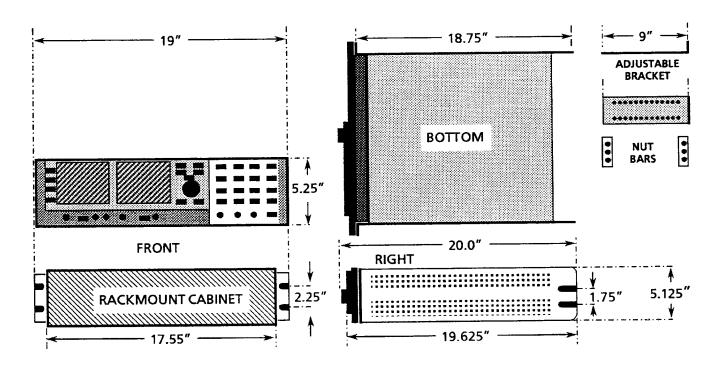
Dimensions used for rack mounting the 1780R-Series Video Measurement Set
